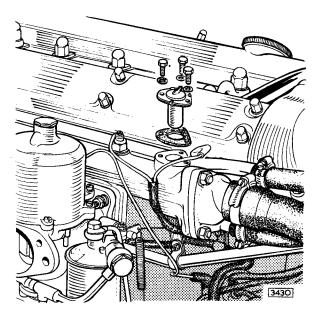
The removal of the auxiliary starting carburetter thermostatic switch.
